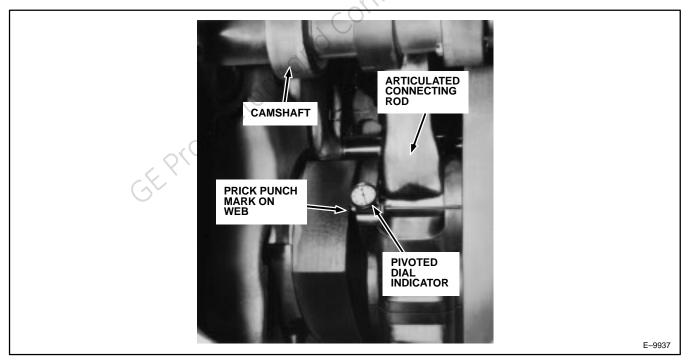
Measuring Crankshaft Web Deflection On Rear Crank Throw.
